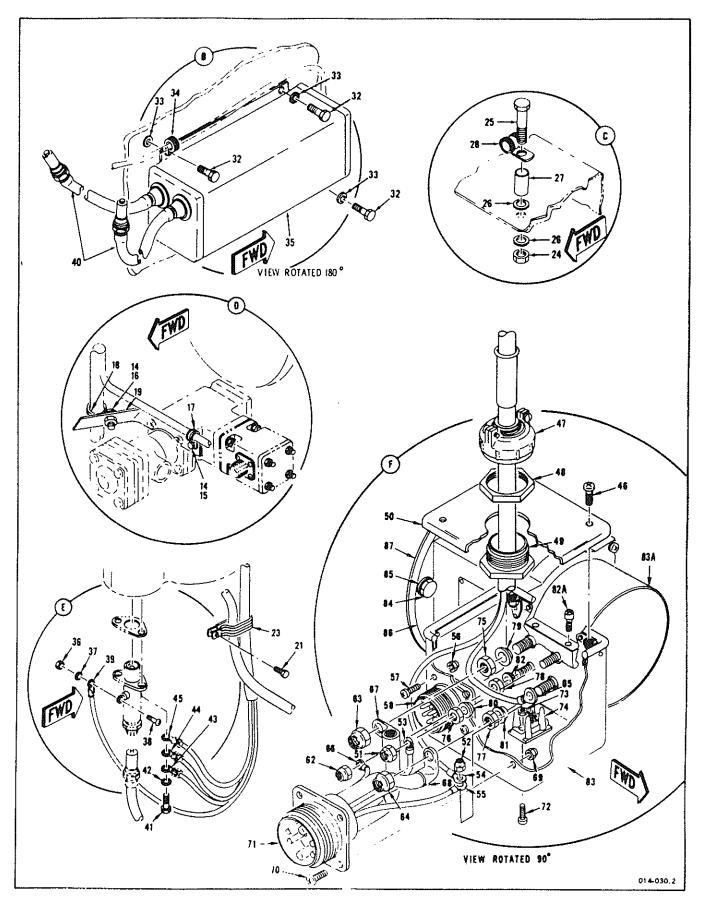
Electrical System Installation, Exploded View (Sheet 2 of 2)
